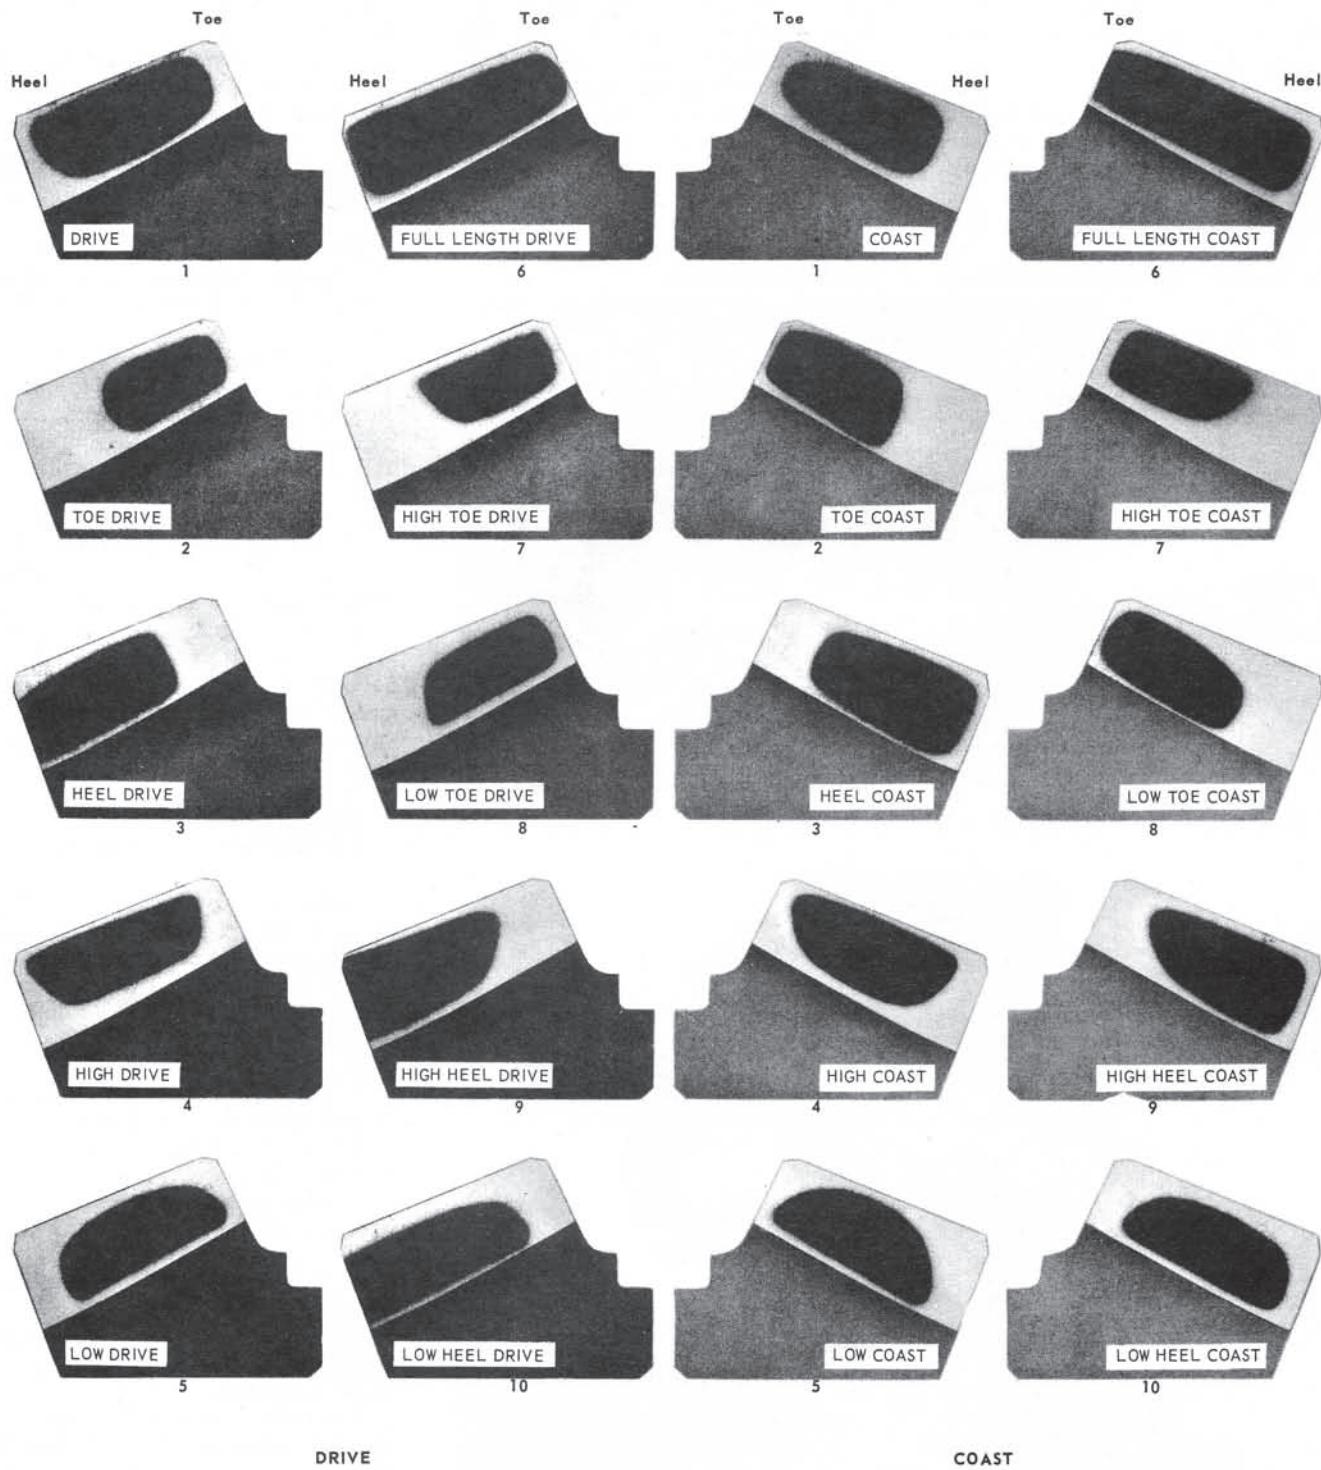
Acceptable Tooth Pattern Limits (All Axles)
